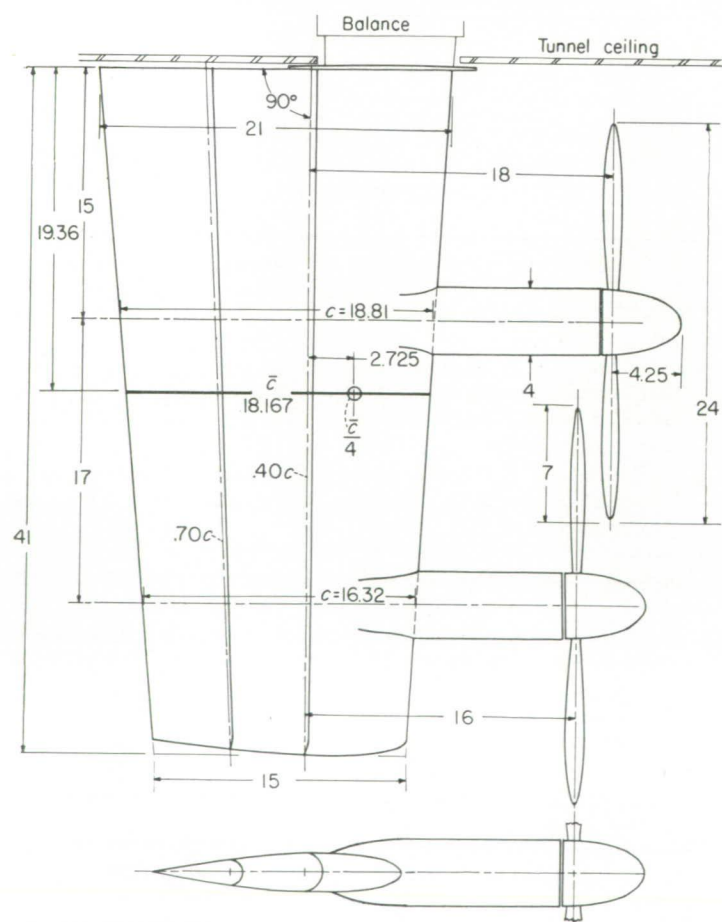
Plan and cross-sectional views of model. (All dimensions are in inches.)
